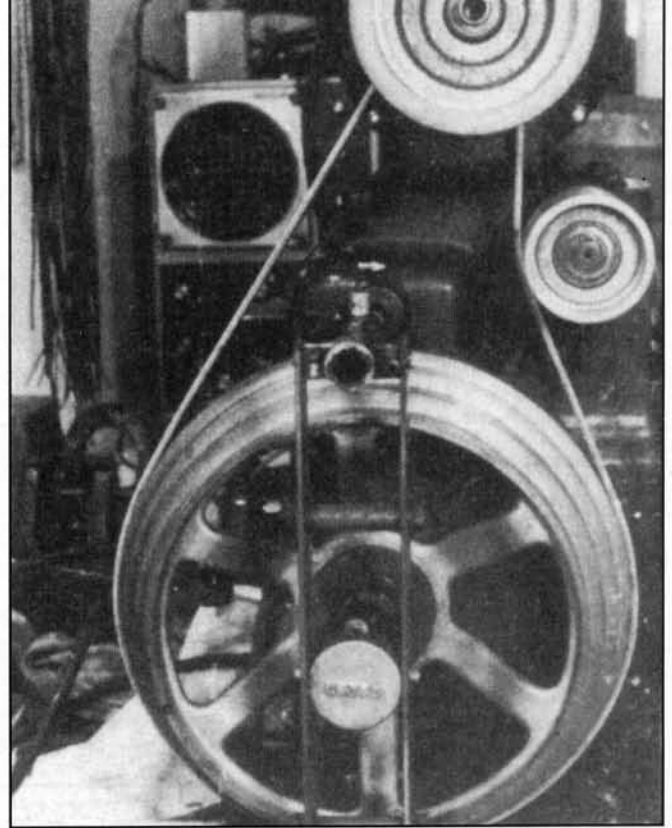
The rear of the honing machine. The jockey pulley is in the driving position in this picture.
